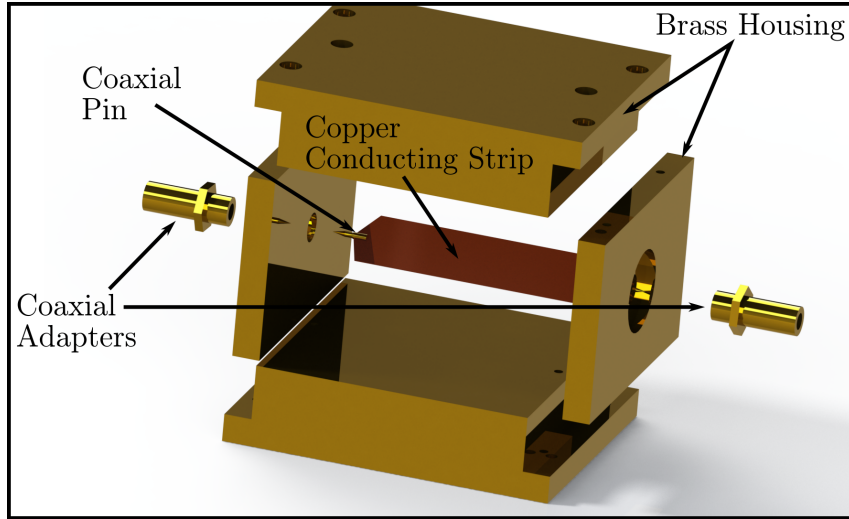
Schematic showing the design for the stripline assembly. A brass housing is produced that can accommodate coaxial adapters at either end. SMA adaptors are soldered to a copper conducting strip such that the strip may be suspended between the top and bottom ground planes by the adapters.
